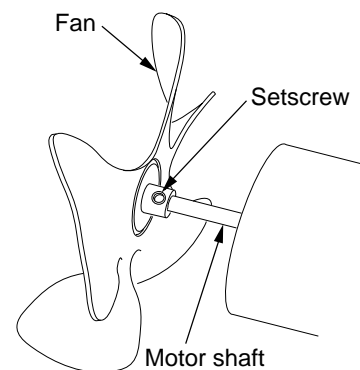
Fan, Motor Shaft, and Setscrew Location
